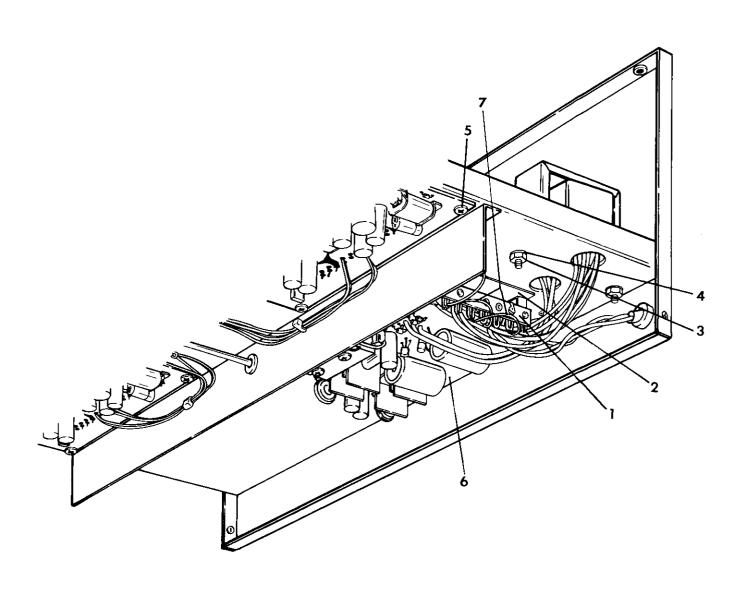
3/4 Front View Inside Bottom Chassis
